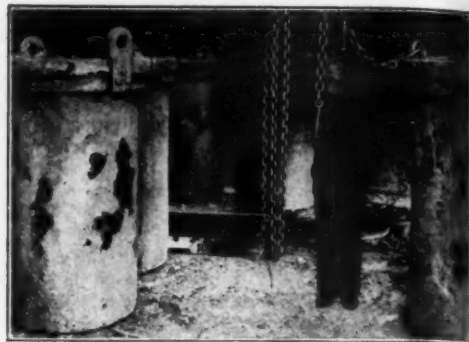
A Number of Large Annealing Pots Used in Wire Mill.
